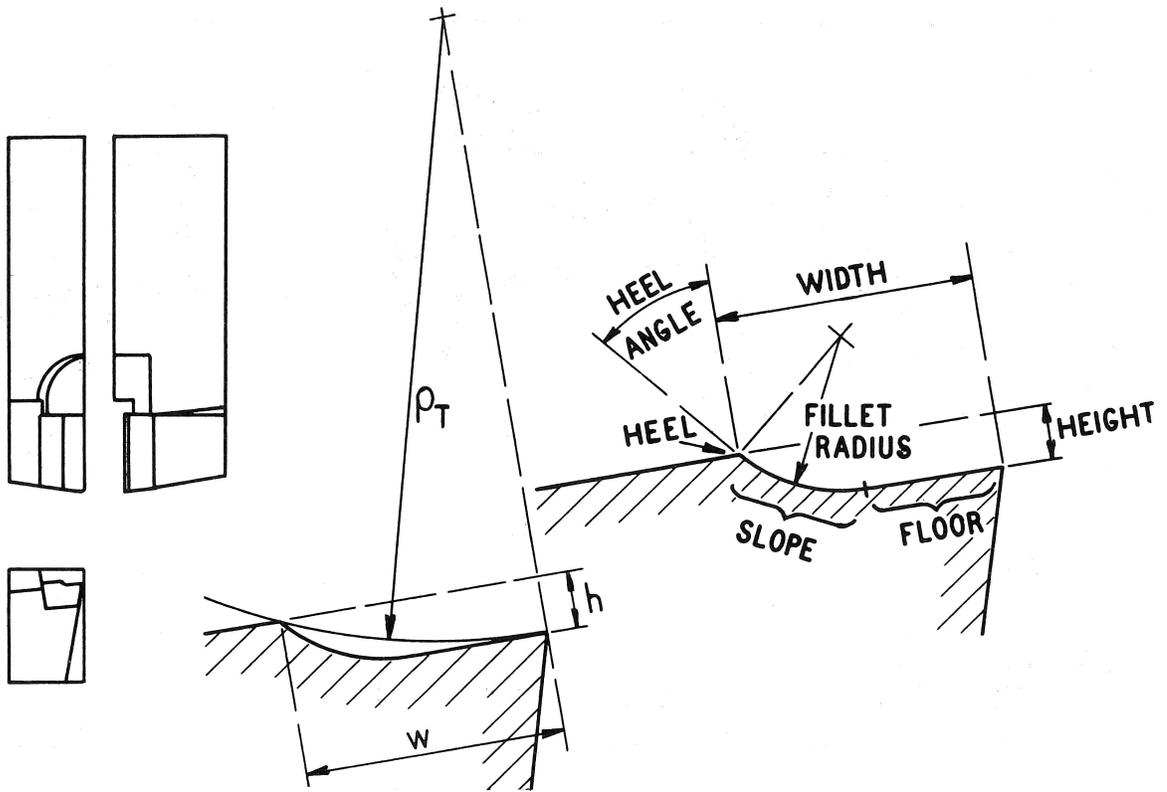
Lathe Tool with Ground, Parallel, Step Type of Chip Breaker. Elements of the Chip Breaker.
